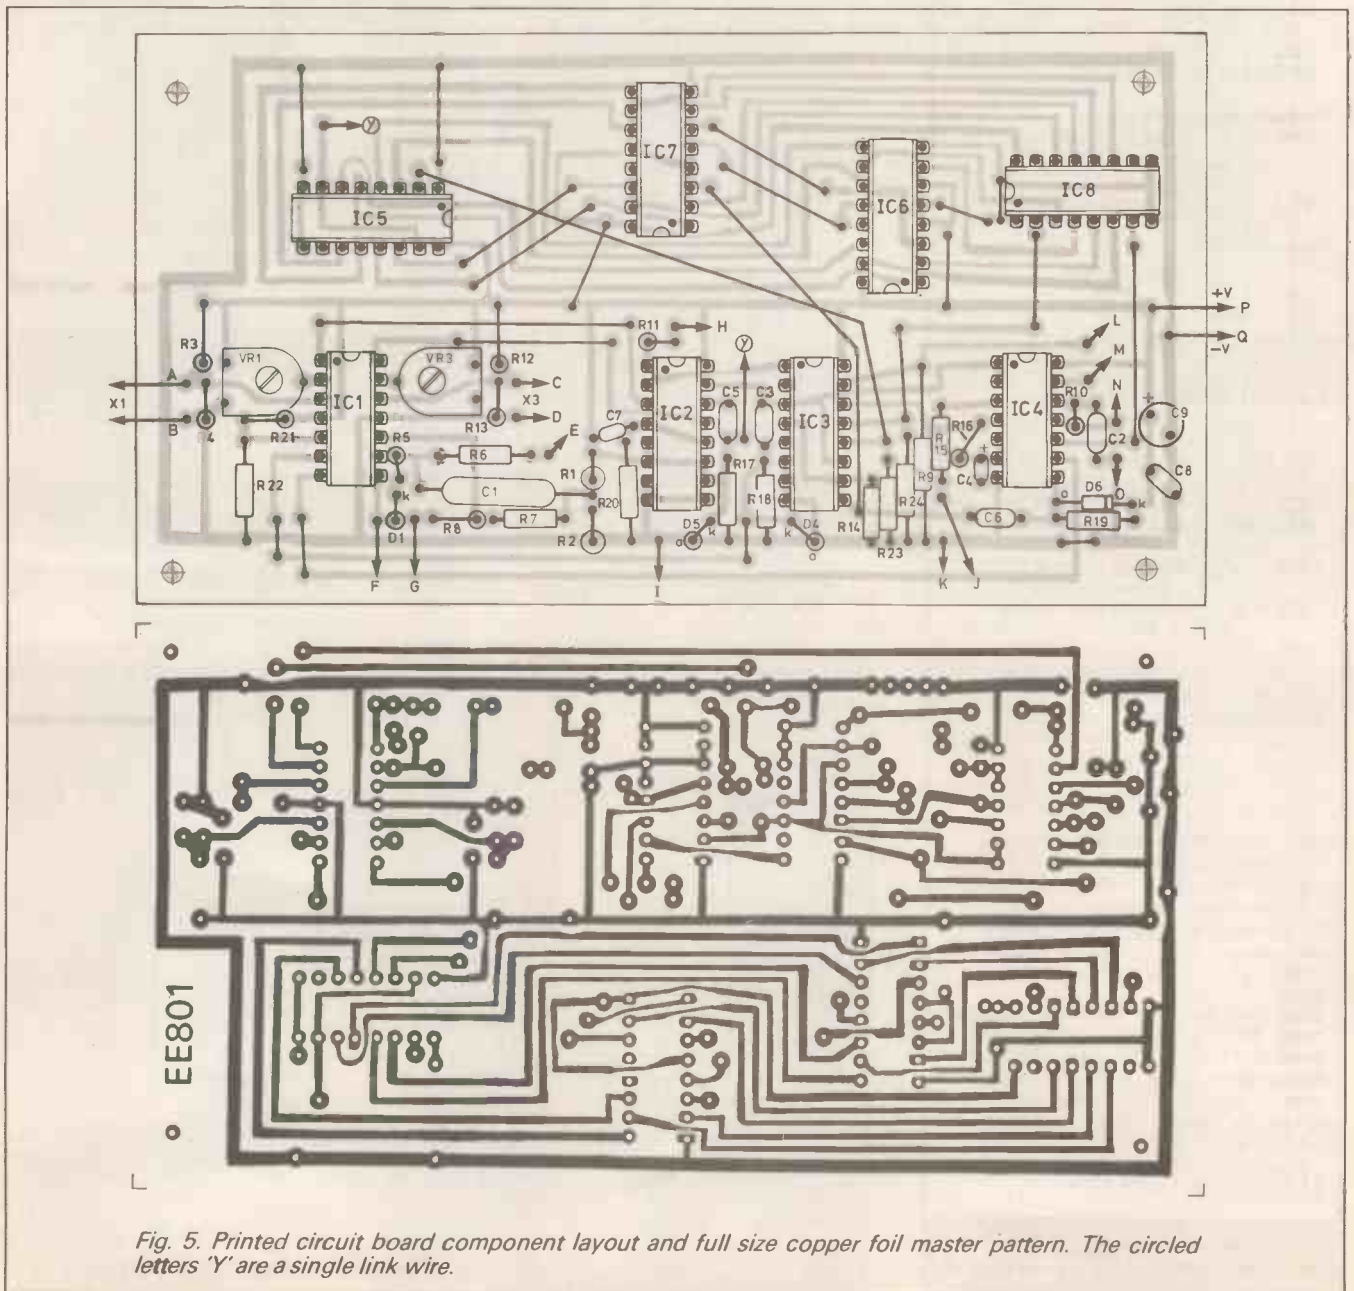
Printed circuit board component layout and full size copper foil master pattern. The circled letters 'Y' are a single link wire.
